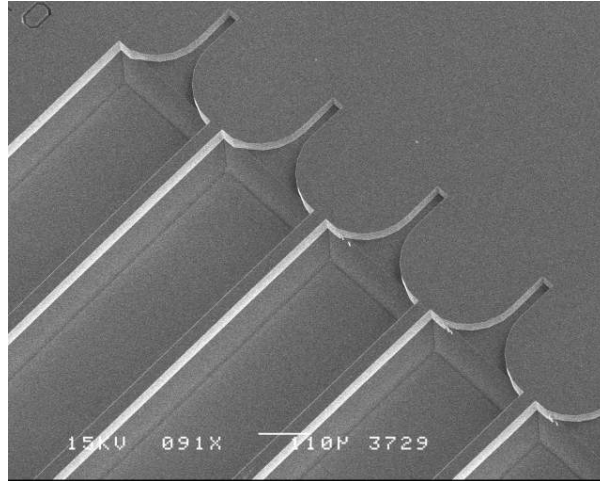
Nozzles for inkjet printers, manufactured by C2V. This picture shows the interior structure of a nozzle chip. At the end of the fabrication process, a thin silicon sheet is fusion bonded on to the nozzles and they are opened by dicing through the end part.
